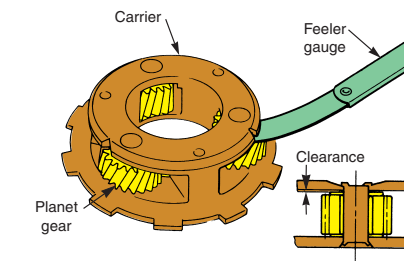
The planet gears and planet carrier can be checked for wear with a feeler gauge, as shown here. Disassembly is not required to make this check. (Nissan)
